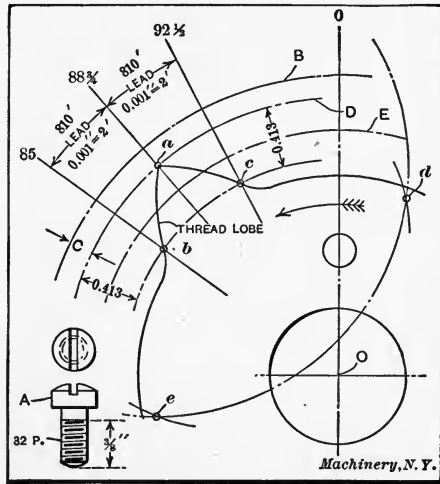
Method of Constructing Thread Lobe on Lead Cam
